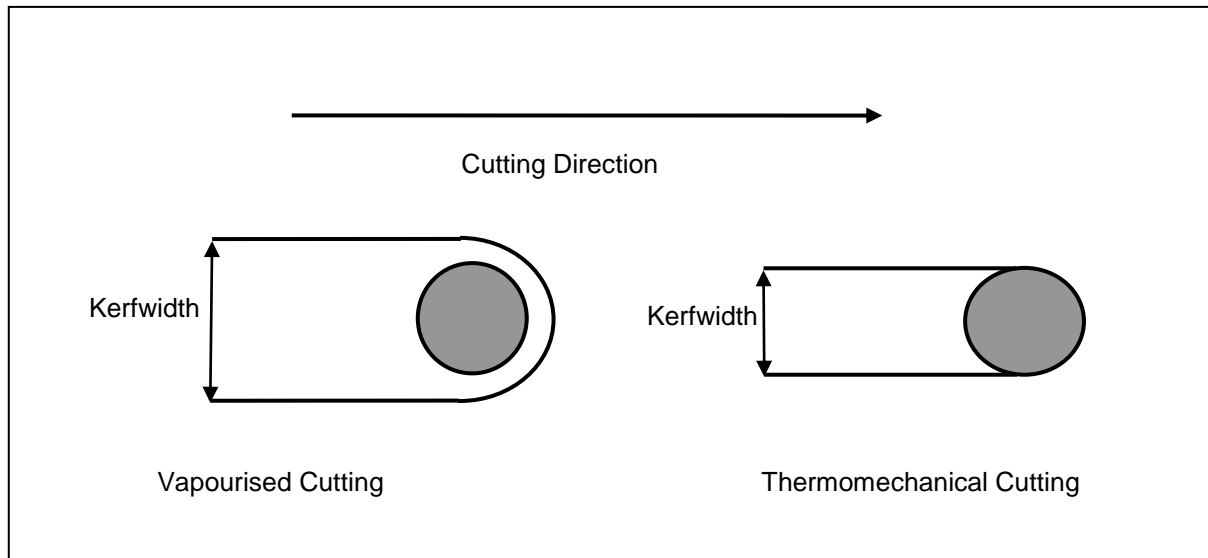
Kerfwidth for Vapourised and Thermomechanical cutting with a hot-wire tool, shown in cross-section
